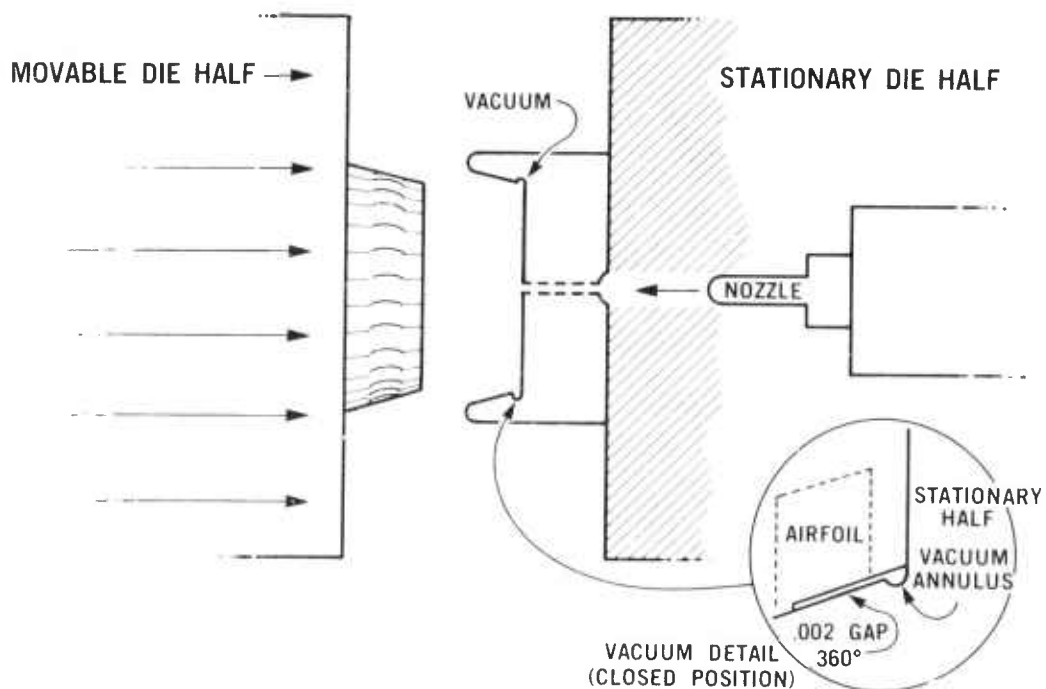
Schematic of Vacuum Addition to Rotor Tooling
